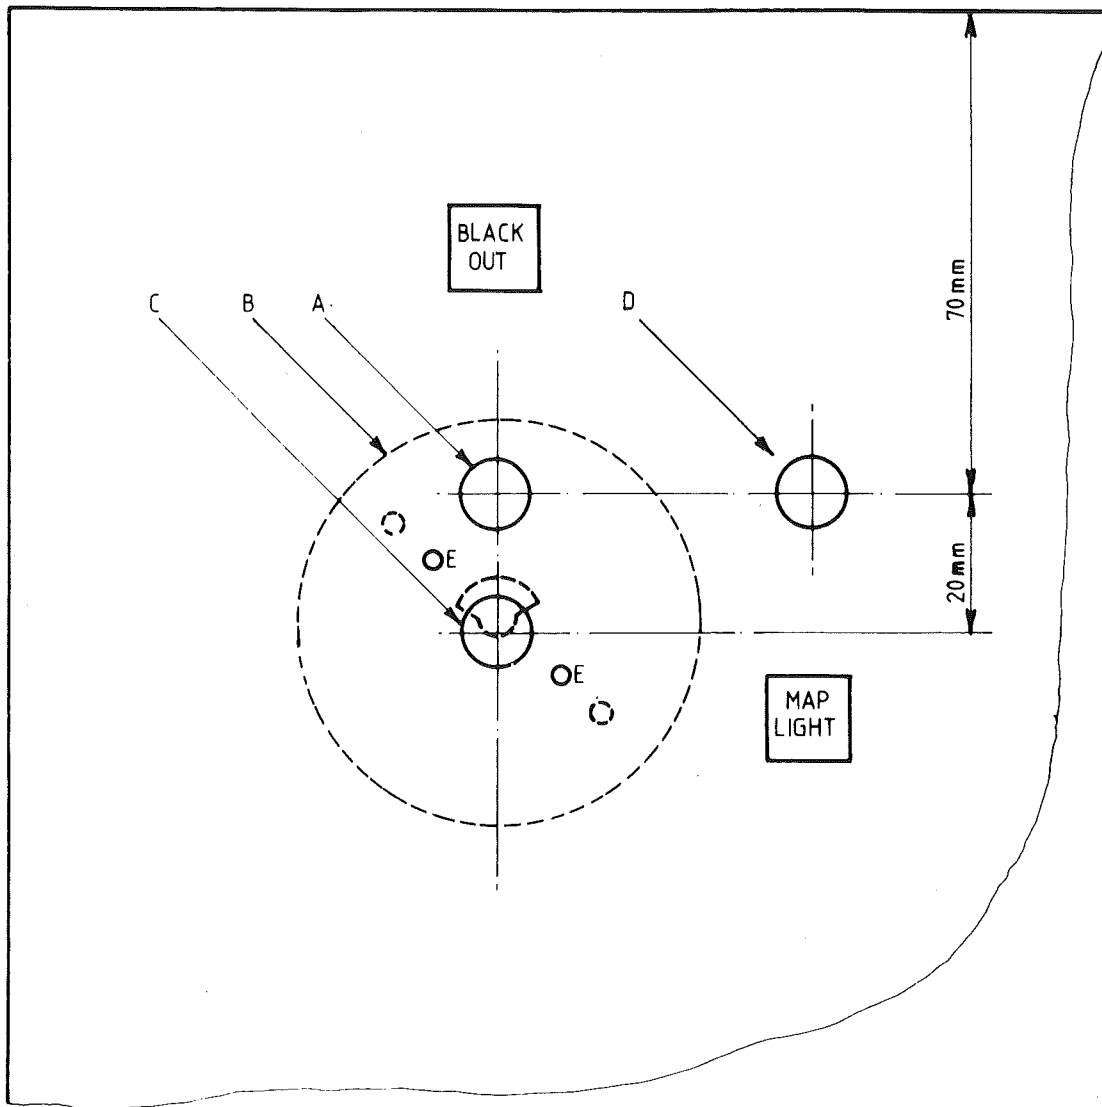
MOUNTING HOLES - BLACKOUT SWITCH PANEL
